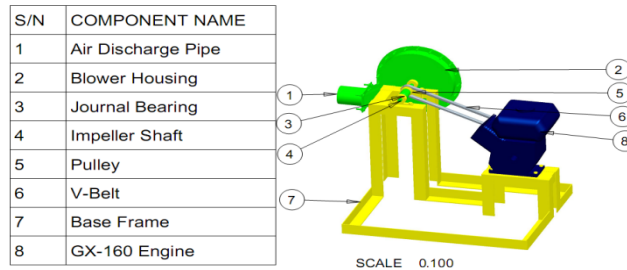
Trimetric drawing of the engine-driven blower in Pro-Engineer software
